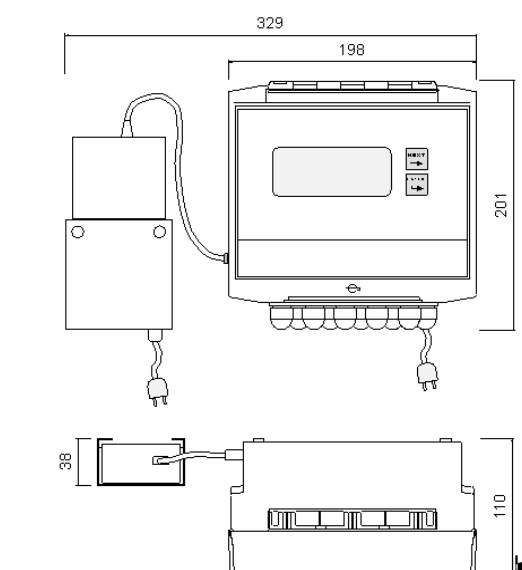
Dimensions of controller with DC switching power supply (Front and top view)
